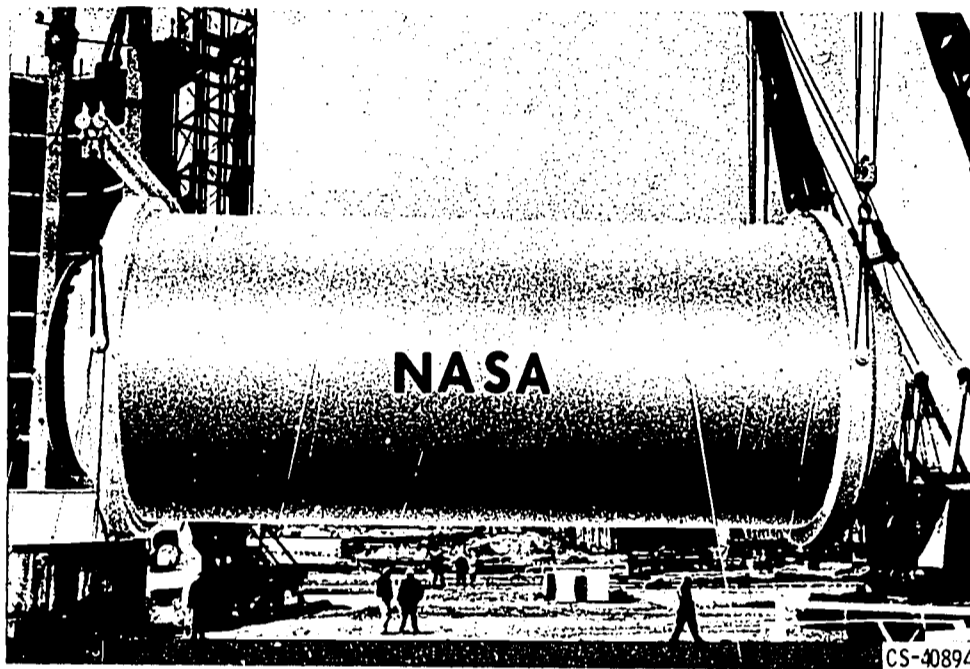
260-Inch-diameter casing manufactured with the use of multiple-pass tungsten-inert gas welding technique.
